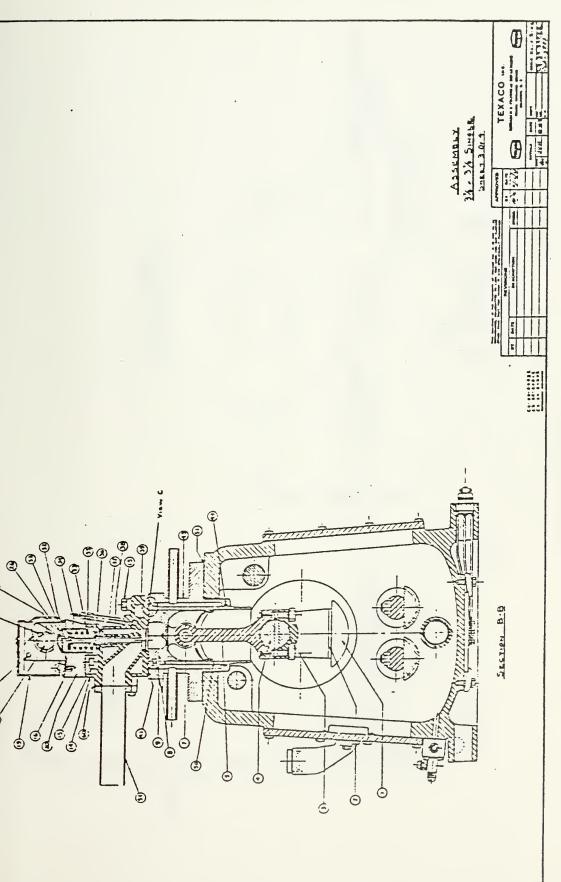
SINGLE CYLINDER TEST ASSEMBLY
